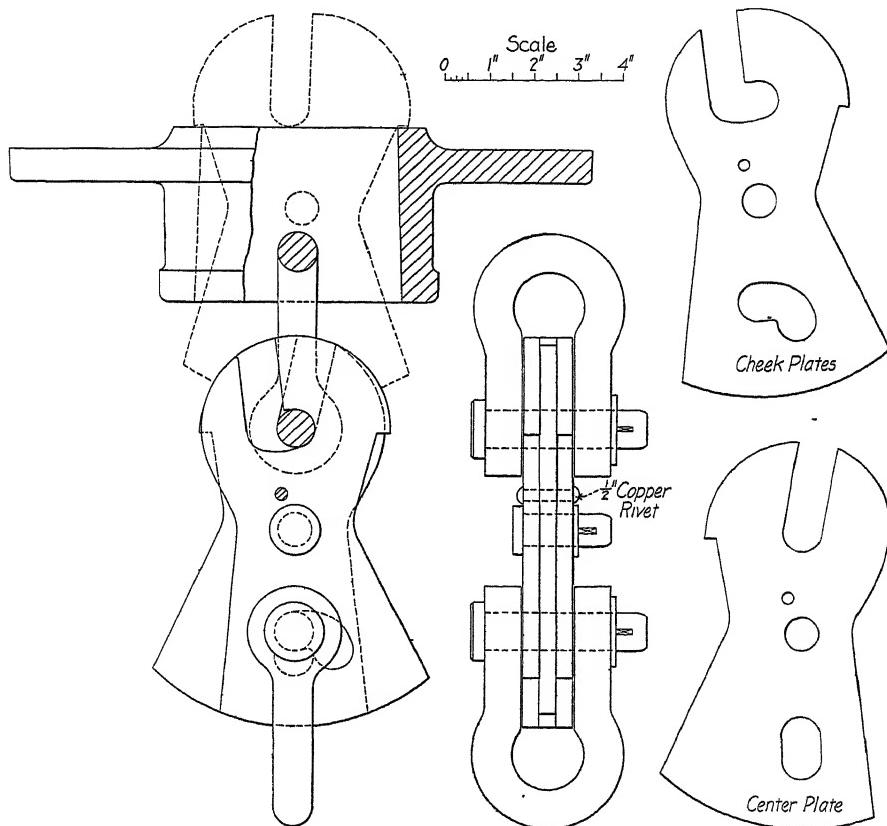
ORMEROD TYPE OF SAFETY DETACHING LINKS.
